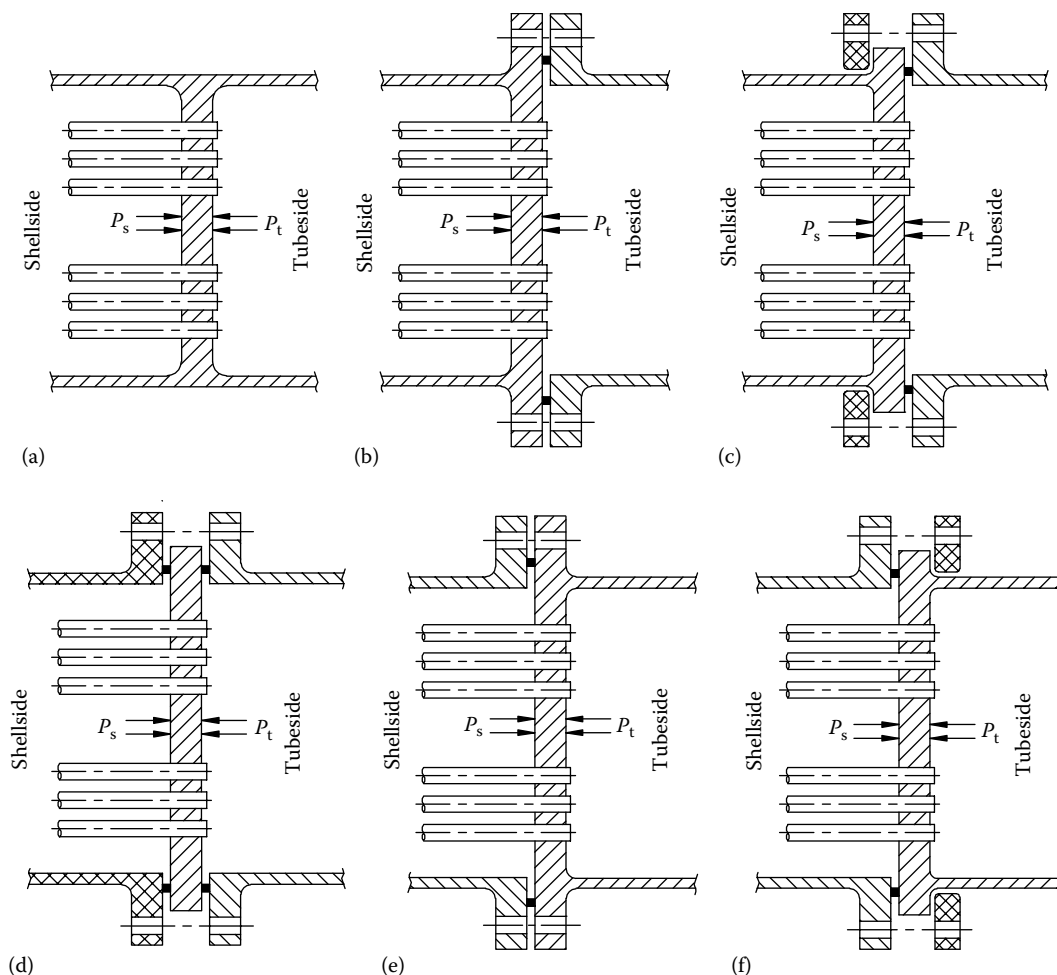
Six possible connections of tubesheet with shell and channel. (a) Tubesheet integral with shell and channel, (b) tubesheet integral with shell and gasketed with channel, extended as a flange, (c) tubesheet integral with shell and gasketed with channel, not extended as a flange, (d) tubesheet both shellside and tube-side gasketed construction, not extended as a flange (e) tubesheet gasketed on shellside and integral with channel, extended as a flange, and (f) tubesheet shellside gasketed and tubeside integral construction, not extended as a flange.
